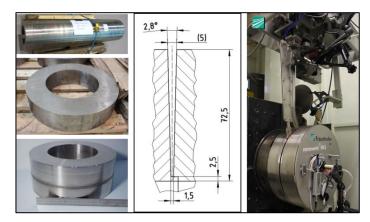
Overview – left: pipe and pipe elements; middle: weld seam preparation; right: experimental set-Up.
